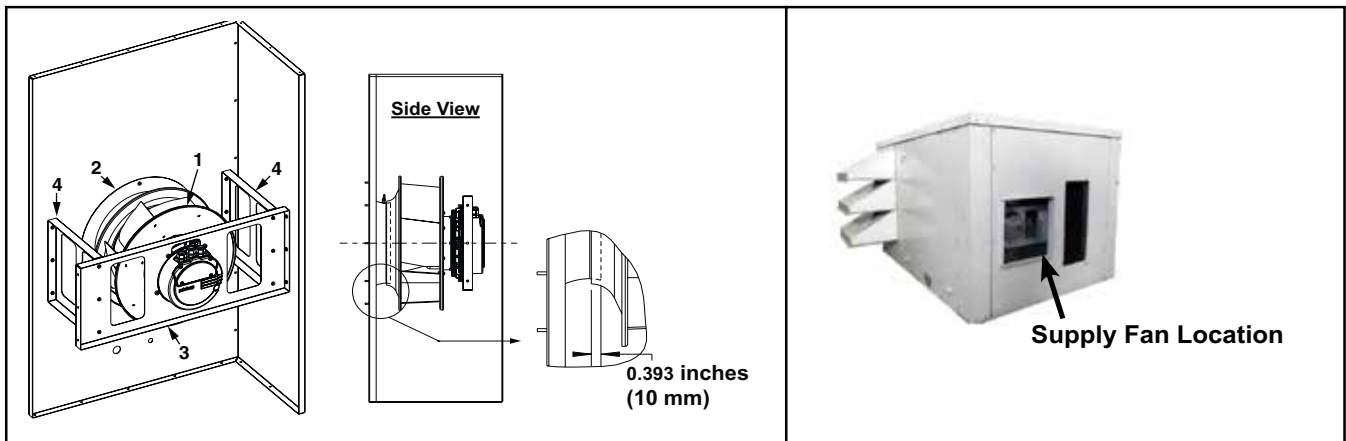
Supply Fan Assembly (Refer to [Table 9](#))
